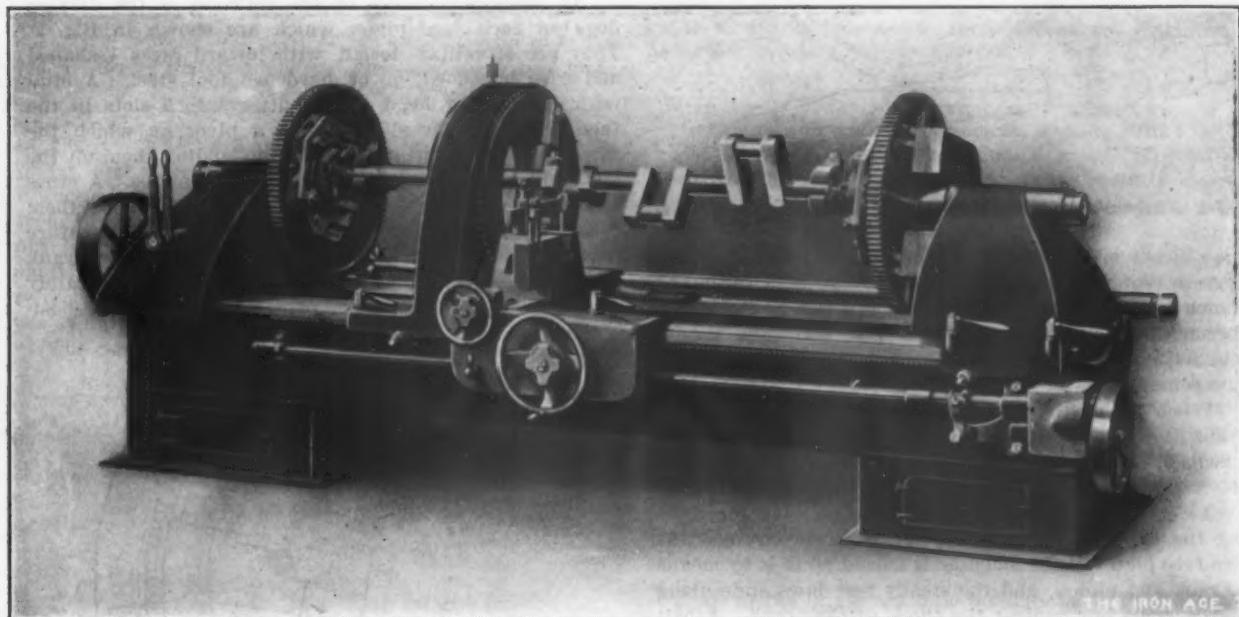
The Tindel-Albrecht Crank Shaft Lathe.
